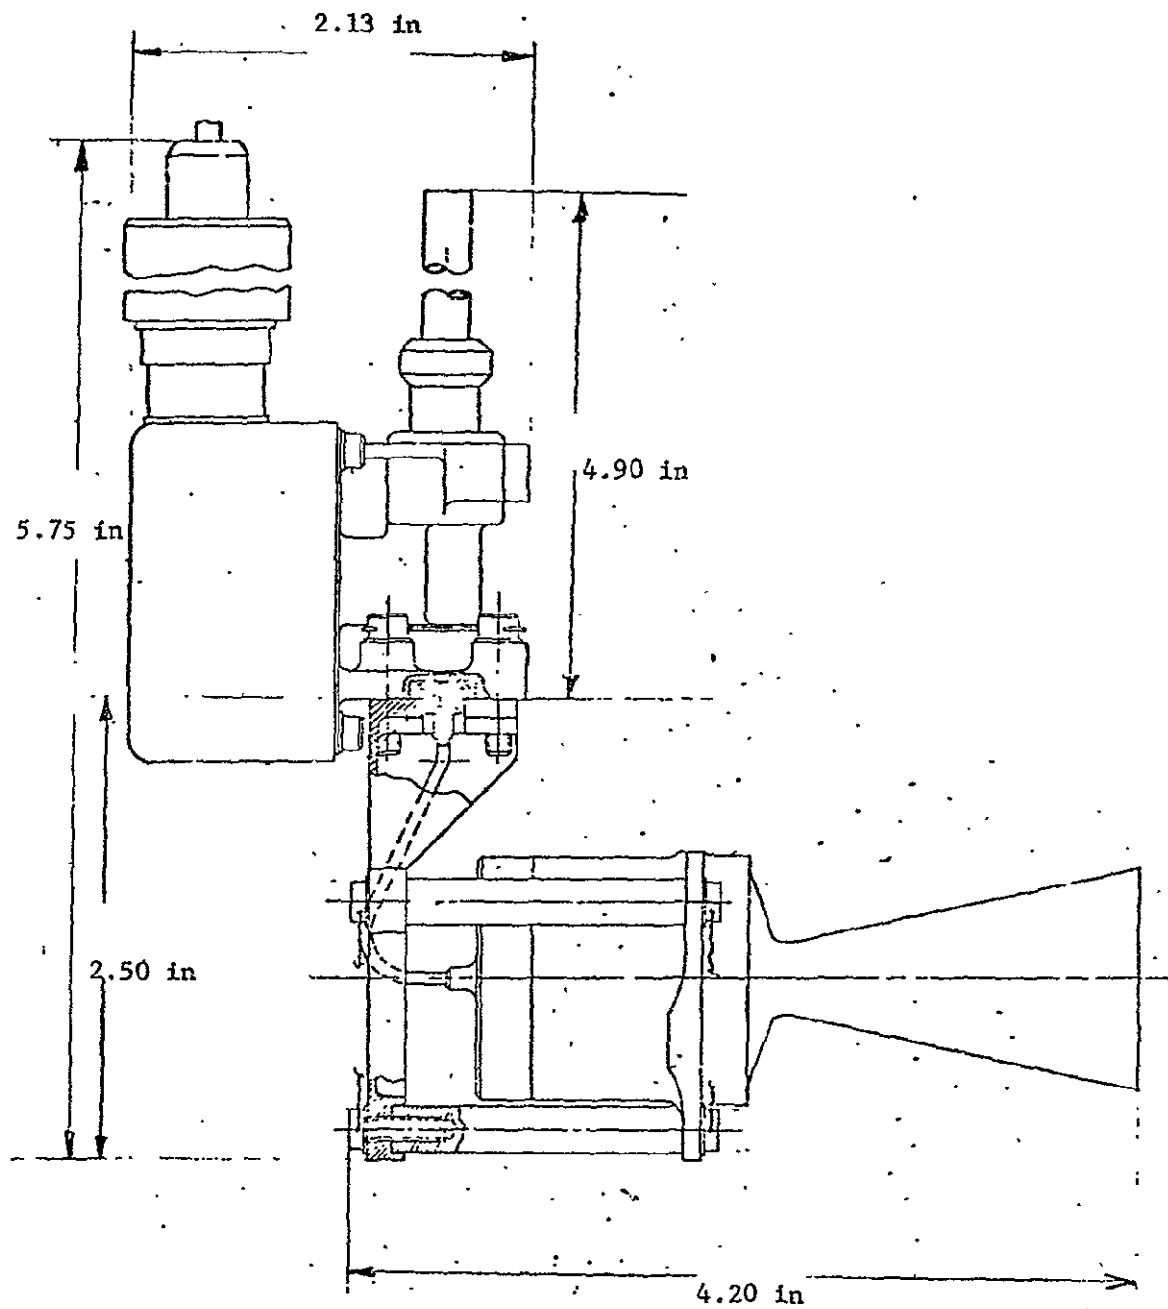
Hughes 5.0 Lb Thrust Engine Assembly
